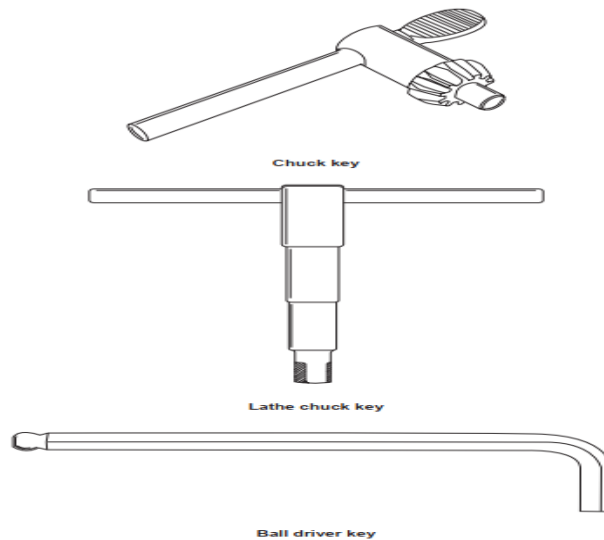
61 Keys, (a) Chuck key, (b) Lathe Chuck key, (c) Ball driver key
